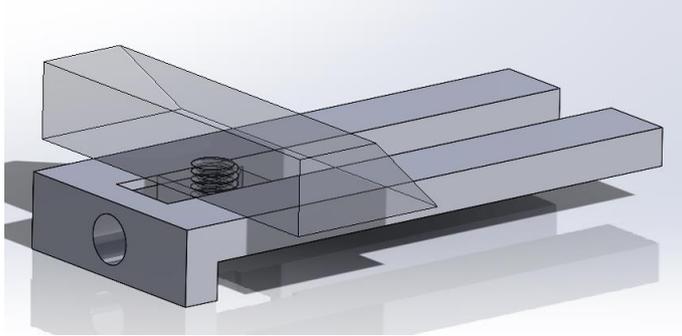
Positioning tool model. Upper part of the tool is transparent to illustrate threading.
